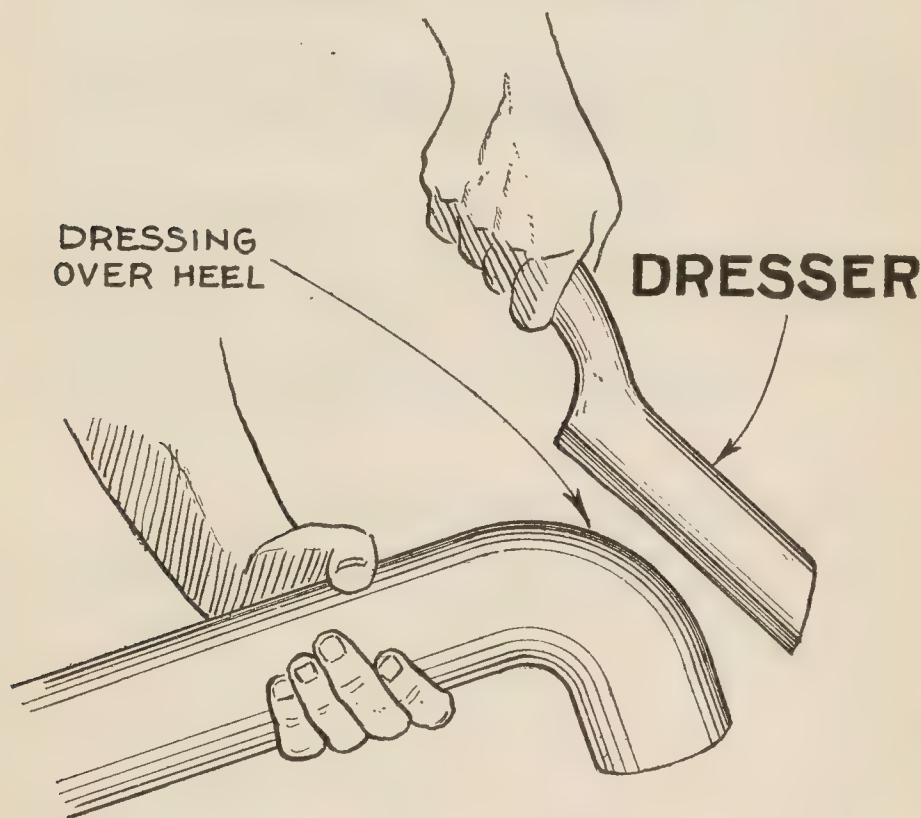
,532.—*Bending by cutting and beating, 3.* Dressing over heel with dresser.
